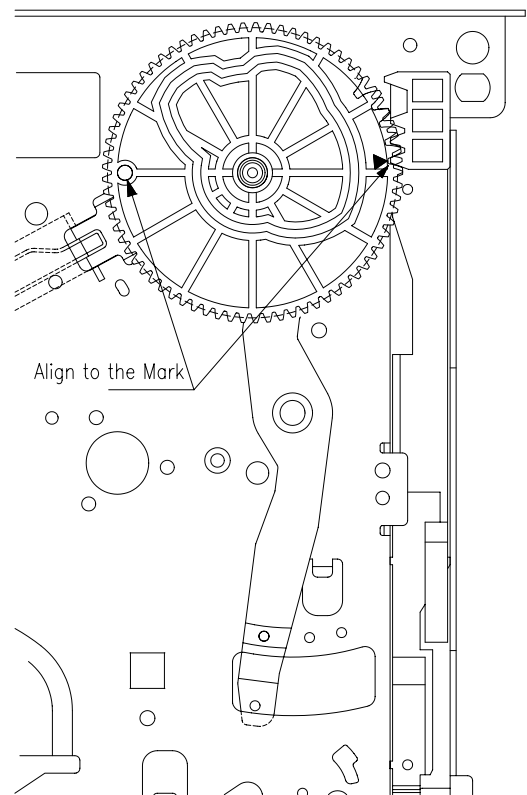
Assembly of the CAM GEAR, FL RACK
